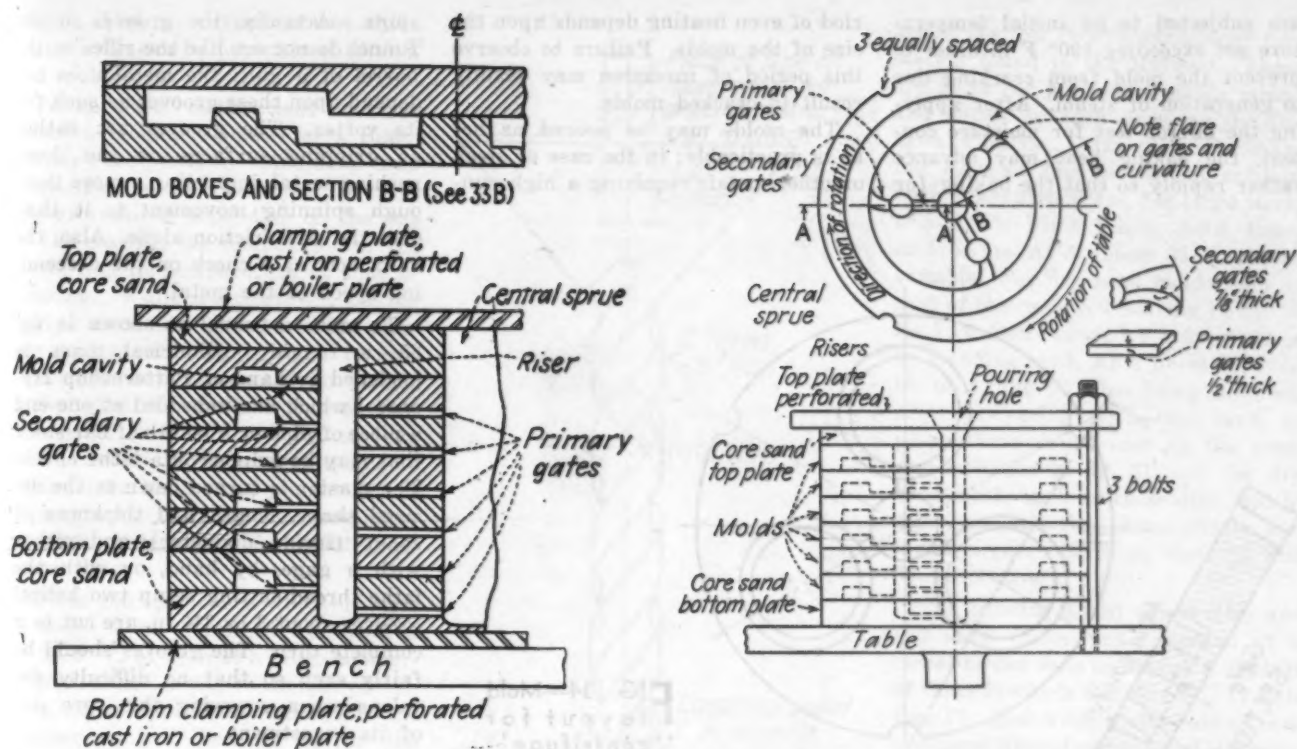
A (left) Design of dry sand stack molds for utilizing "semi-centrifugal" method. B (right) Metal enters primary gates and from riser enters secondary gates filling the mold.
